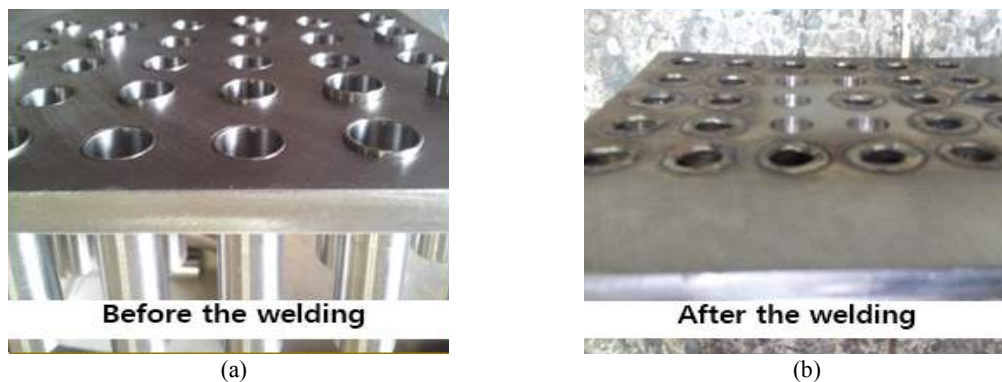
Configuration of the HDSS tube-to-tube sheet welds: (a) before gas tungsten arc welding and (b) after gas tungsten arc welding.
